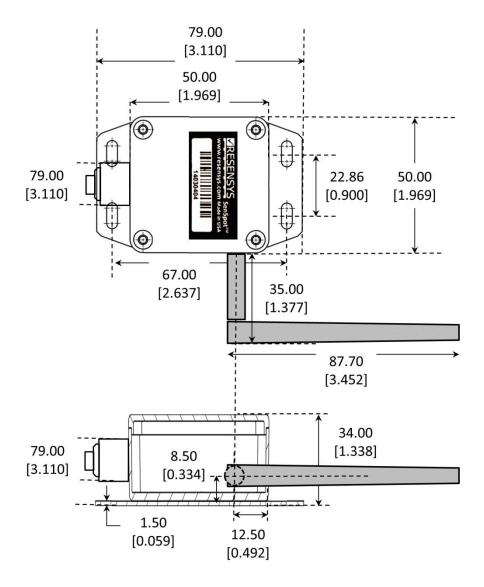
Wireless transmitter dimensions for strain gauge SenSpot<sup>™</sup>. All dimensions are in mm [inch].
